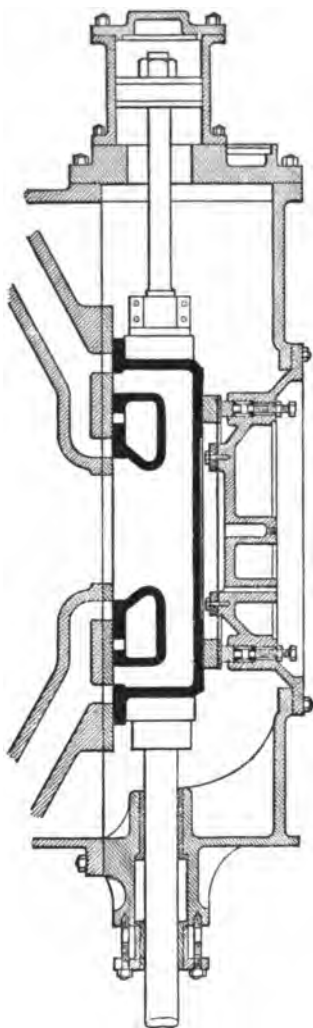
Double-ported Valve with balance-piston and relief-frame.
